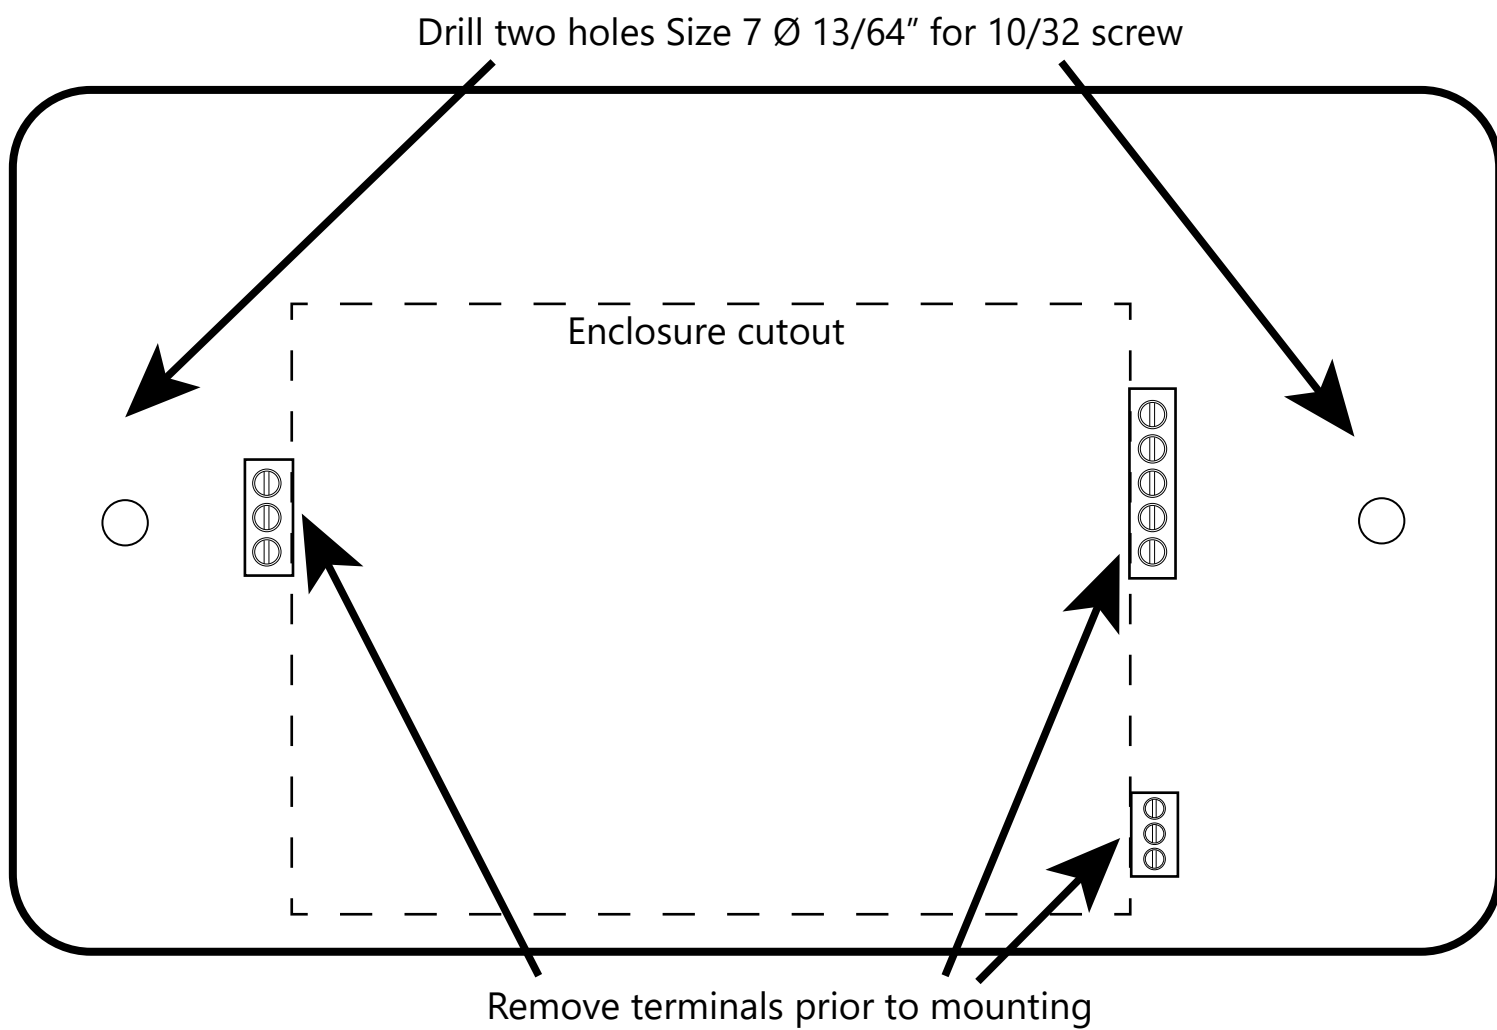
SIGMA3-C-TDM Mounting Template real size to cutout
